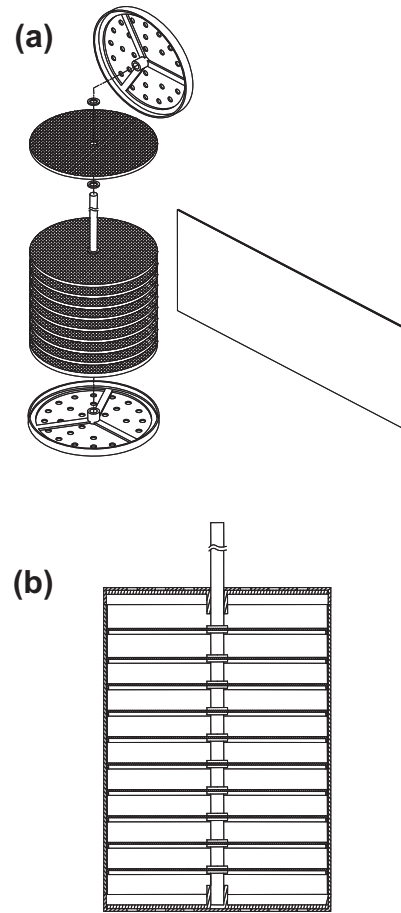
Regenerator assembly, (a) explosion diagram and (b) full assembly.
